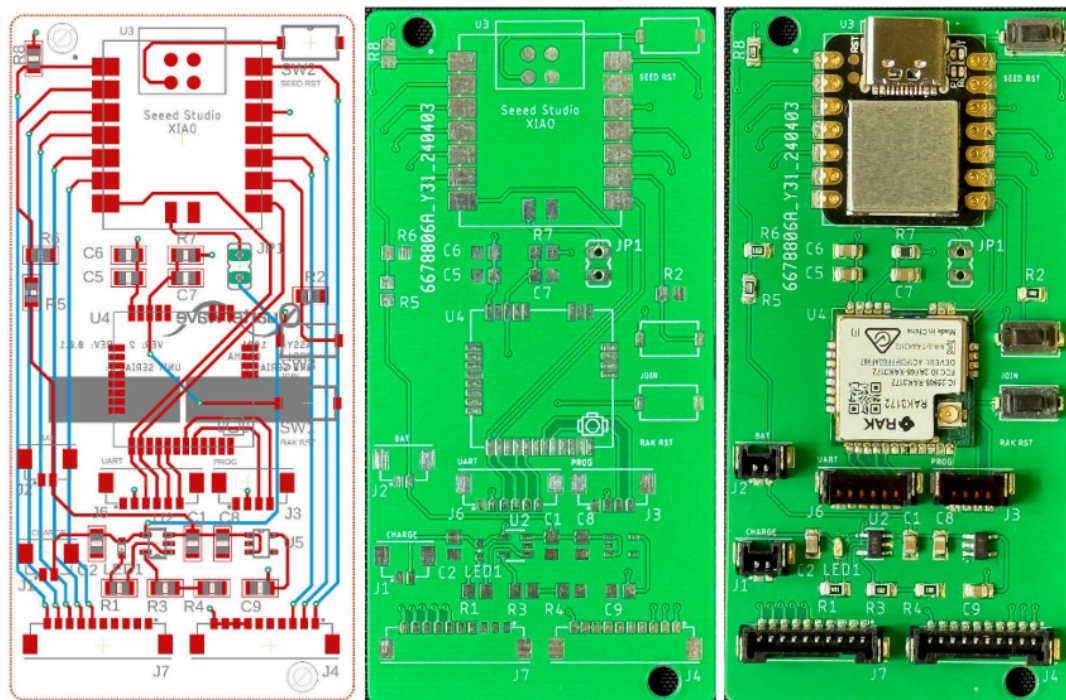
PCB Layout visualized using Autodesk Eagle, A black PCB after being manufactured by PCB way, and lastly as fully assembled PCB with all surface mount components soldered on
